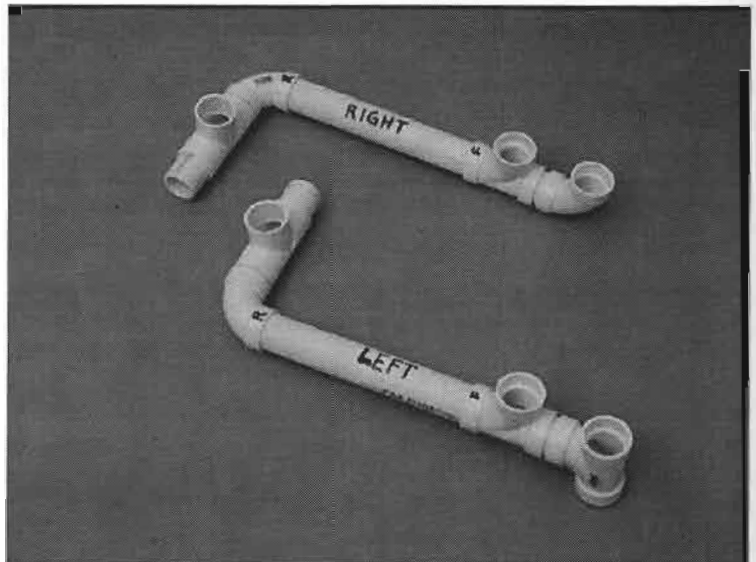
Side Rail Assemblies – showing proper placement to insure correct construction.
